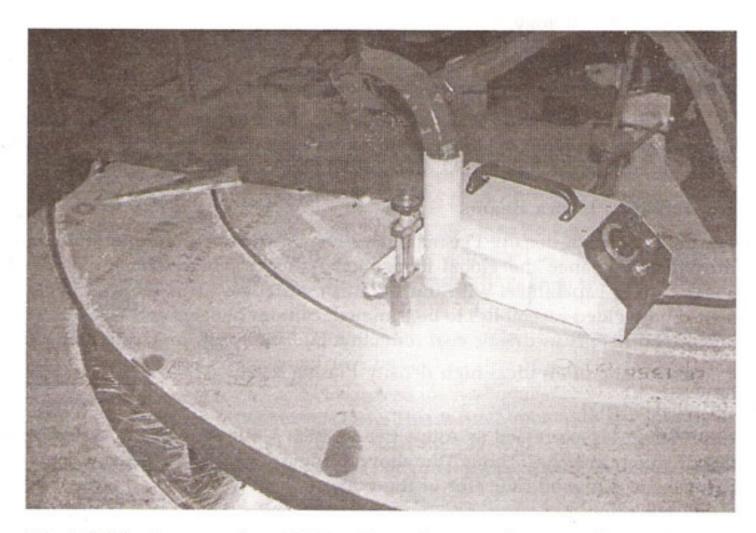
With plazma make m/c & torch, continuous plasma cutting on 100mm stainless steel plate
